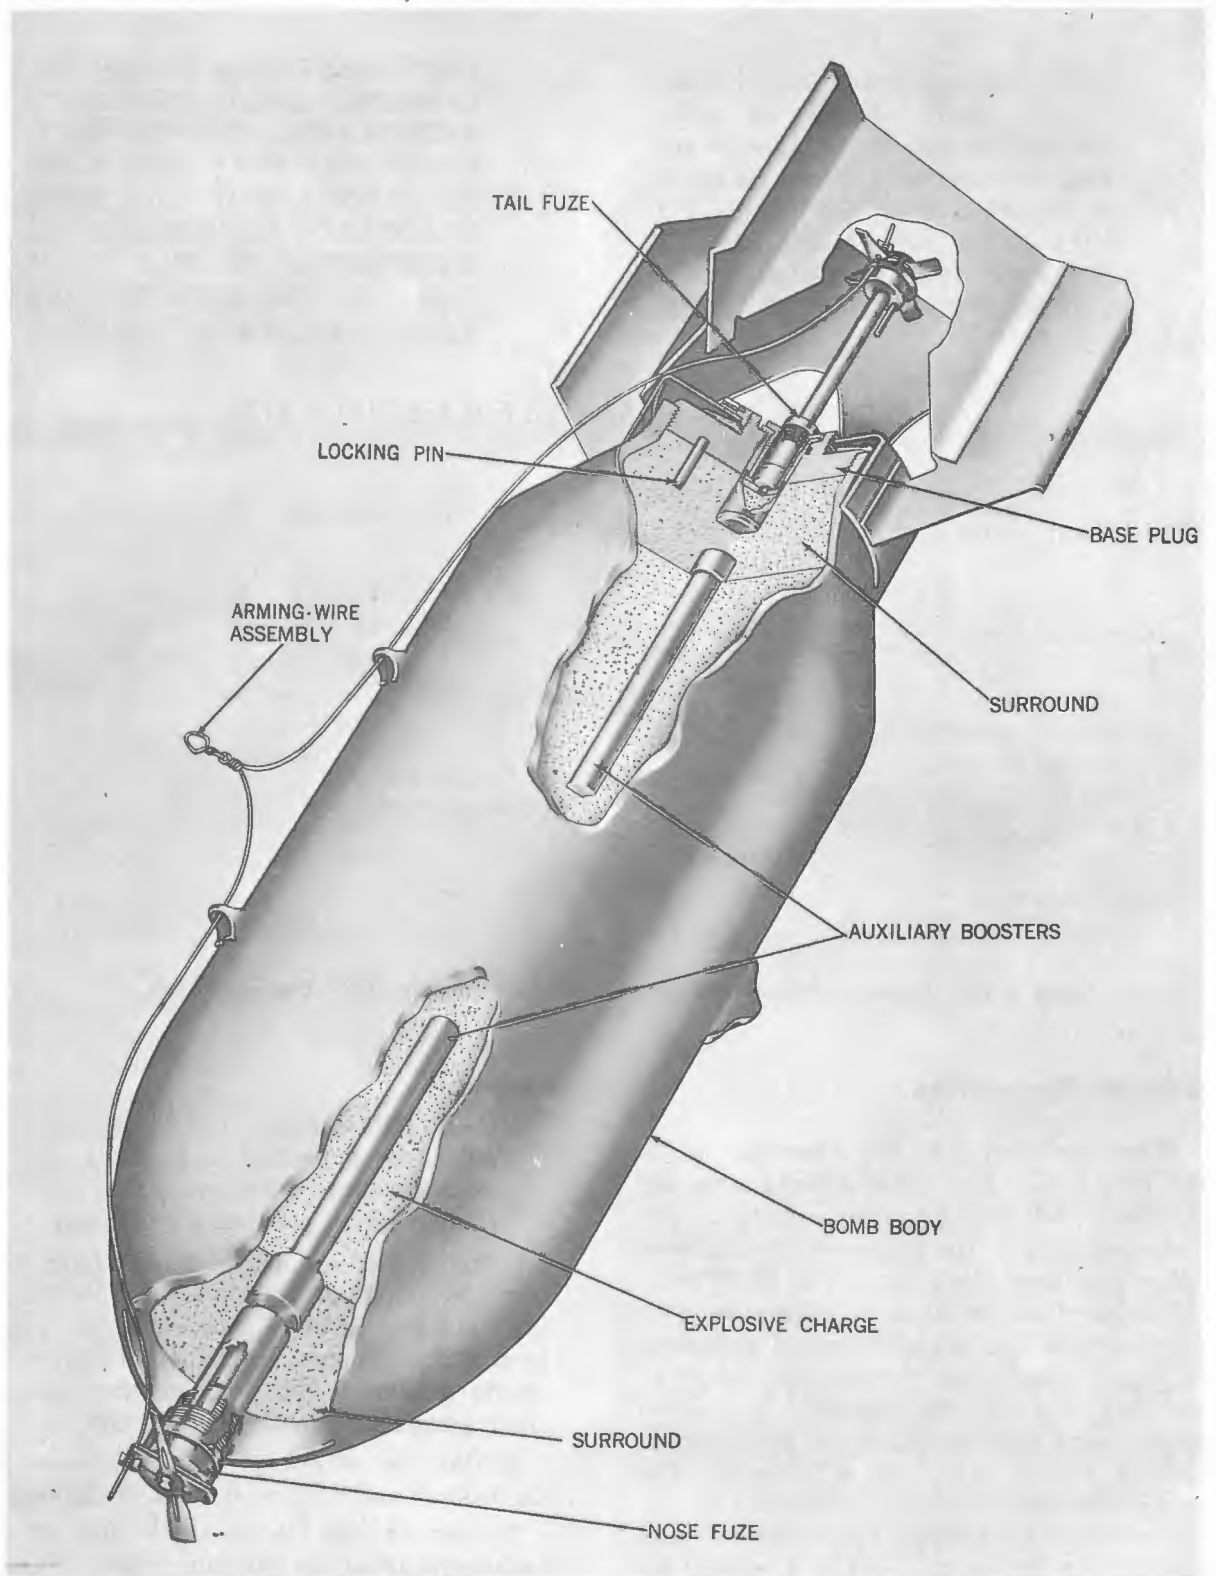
1000-lb GP Bomb AN-M65A1 with Fin Assembly AN-M113A1, Cutaway View.
